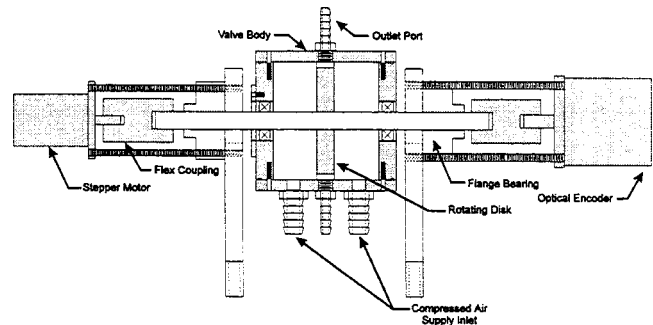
Pressure pulse generator rotary-valve assembly schematic
